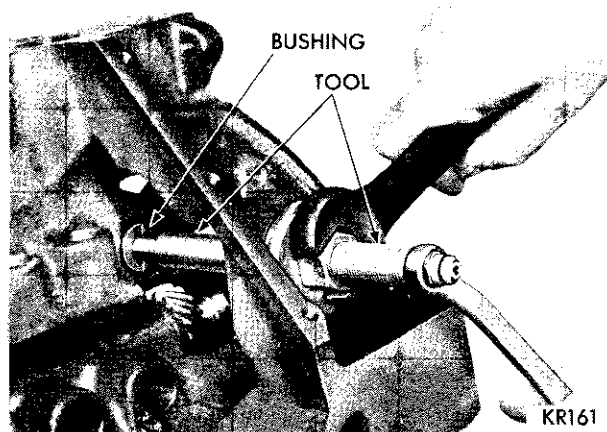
Burnishing Distributor Drive Shaft Bushing
